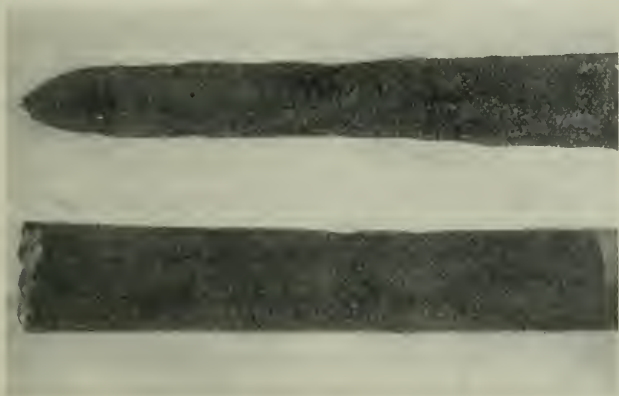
Lead, Cold and Hot Fractures. Full size.
